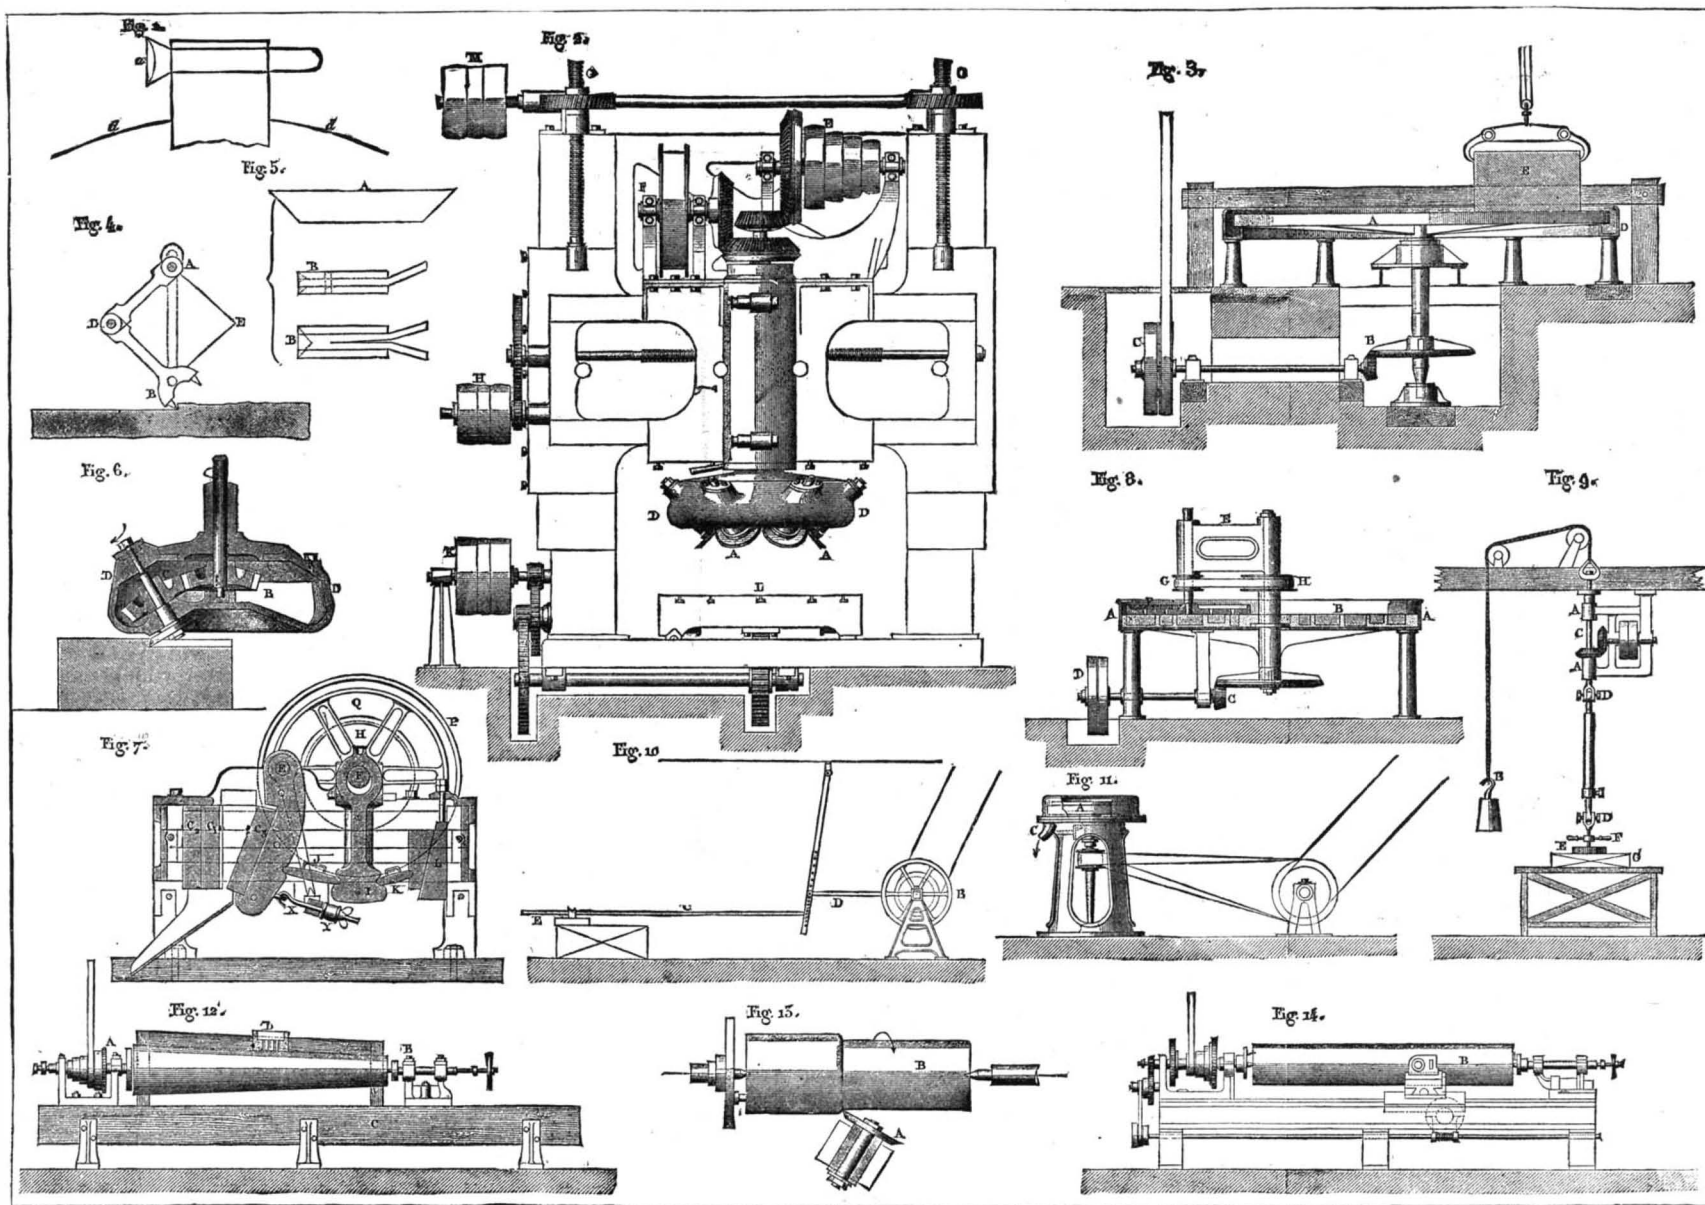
Teeth of Circular Saw. FIG. 2.—Surface Dresser. FIG. 3.—Grinding Machine. FIG. 4.—Mechanical Chisel. FIG. 5.—Teeth of Circular Saw. FIG. 6.—Details of Tool of Surface Dresser. FIG. 7.—Blake Crusher. FIGS. 8, 9, 10, 11.—Stone Polishers. FIG. 12.—Polishing Lathe. FIG. 13.—Details of Tool. FIG. 14.—Stone Lathe.
